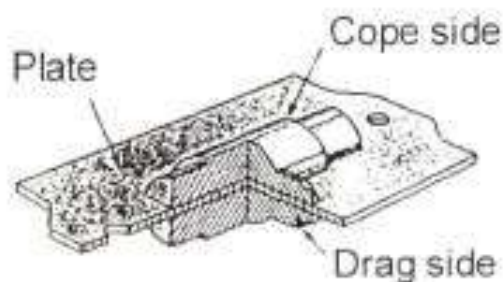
A typical metal match-plate pattern used in sand casting
